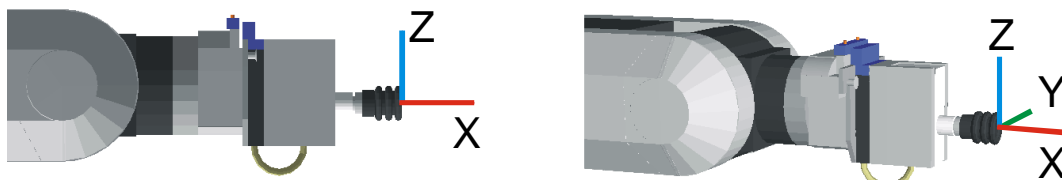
Model of the CRS A465 vacuum tool and its ToolFrame.
